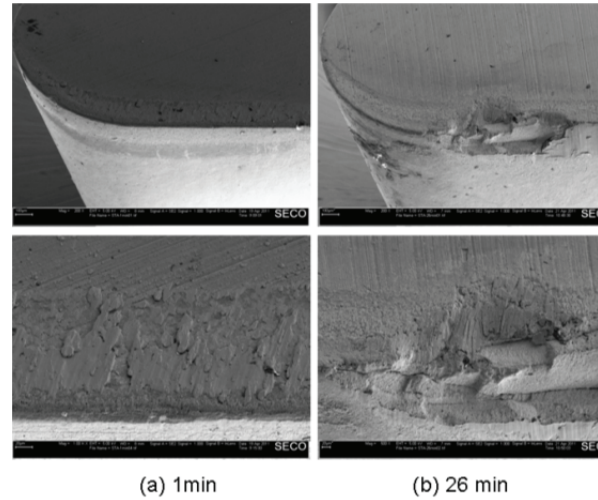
SEM view of the worn insert after milling Ti 6-4 STA (vc=40m/min, fz=0.15 mm/tooth, ap=2 mm)
